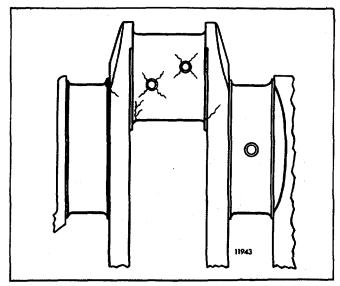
Crankshaft Fatigue Cracks
